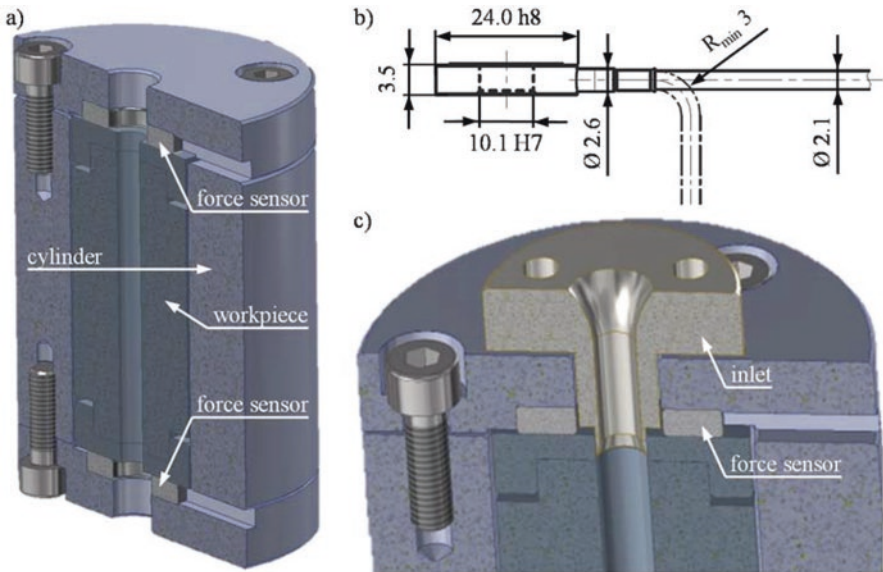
Device for measuring tangential forces; a) assembly with workpiece; b) technical drawing of force sensor [24]; c) inlet for laminar flow without flow constrictions
